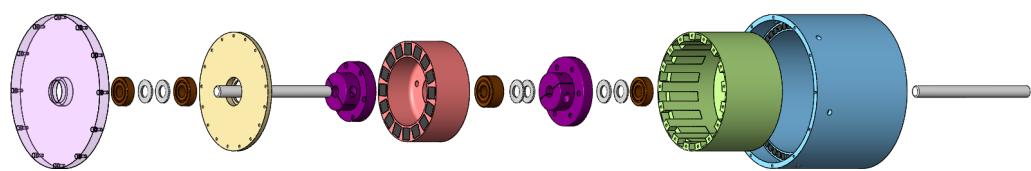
An exploded view of the circular gear (Assembly.SLDASM).
